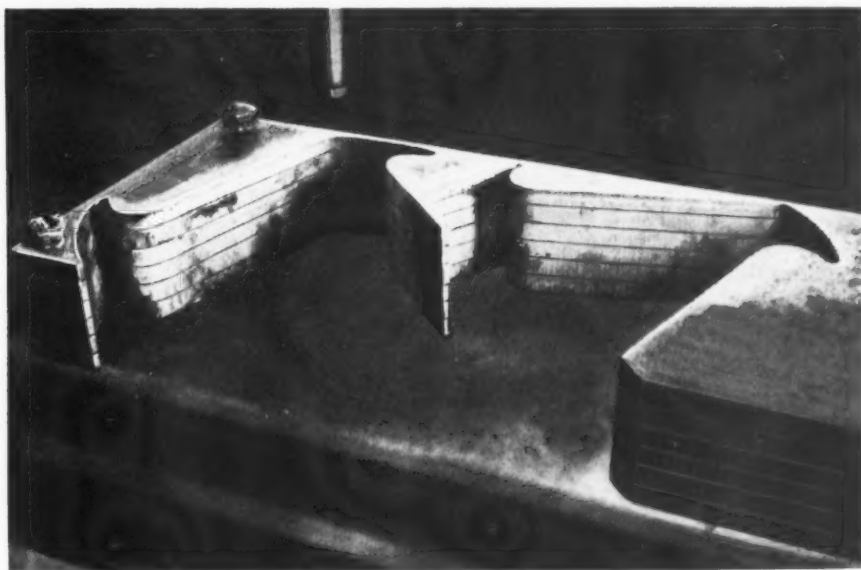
Stack from which Two Sets of Linoleum-cutting Knives have been Flame-cut, Six at a Time, from 3/16-inch Boiler Plate
